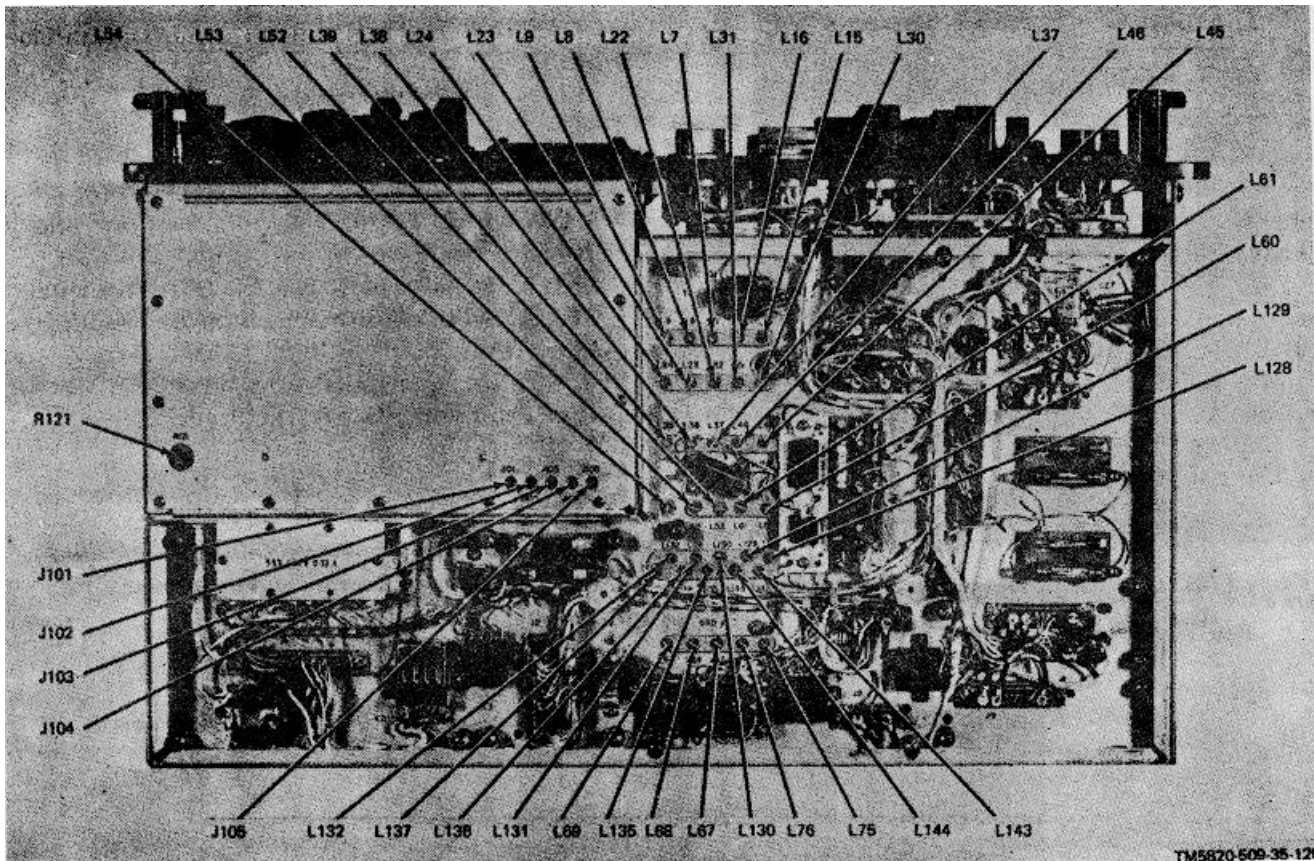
Radio Receiver-Transmitter RT-671/PRC-47 ((A8)), Bottom View, Location of Test Points and Adjustments.
